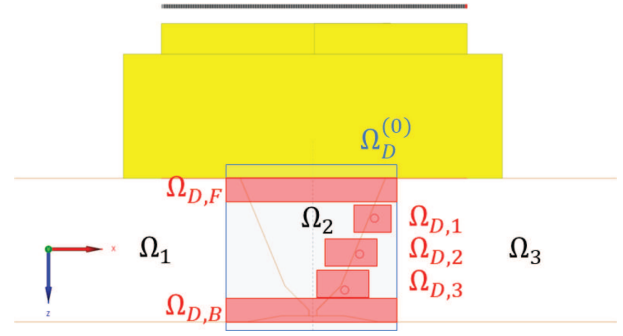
Identified subzones for a weld with three side-drilled holes.
